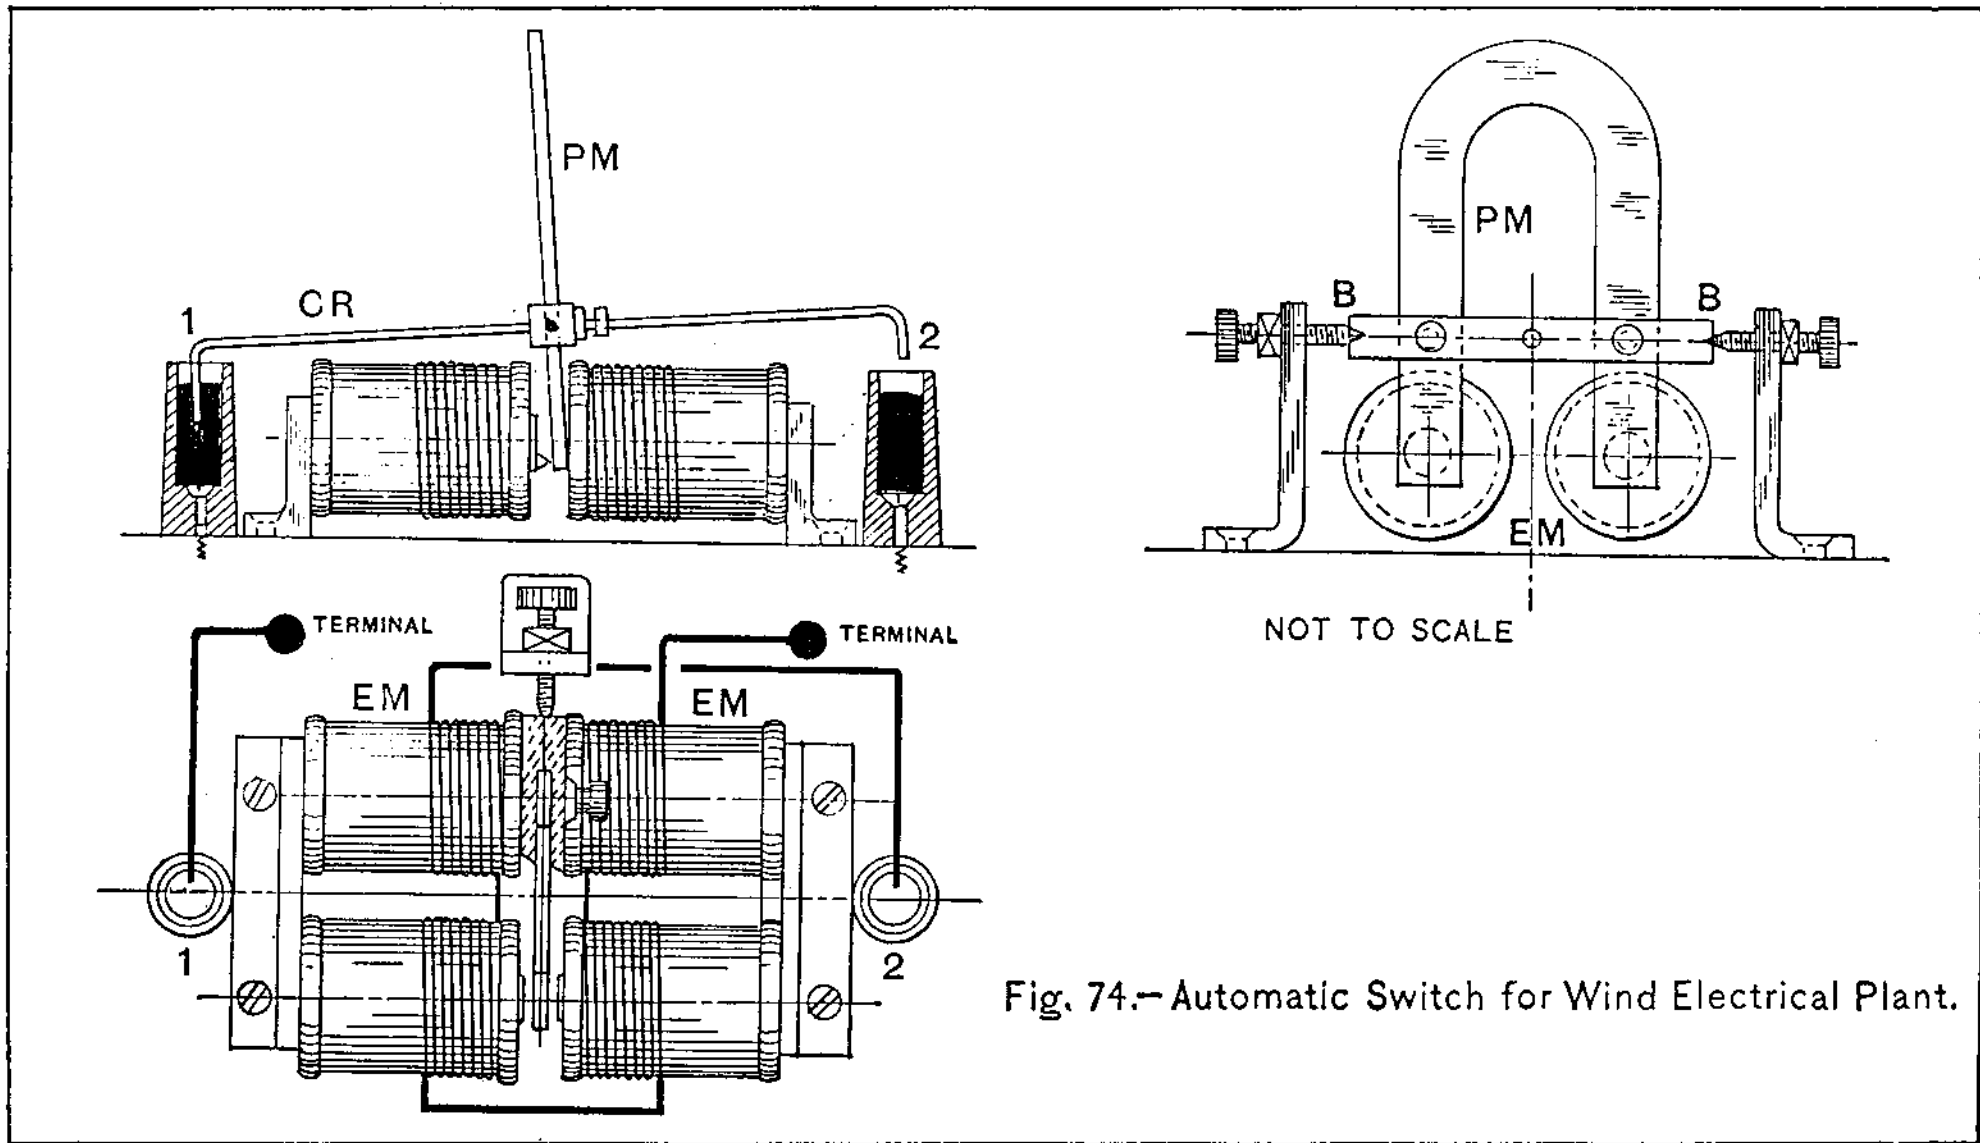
Automatic Switch for Wind Electrical Plant.
